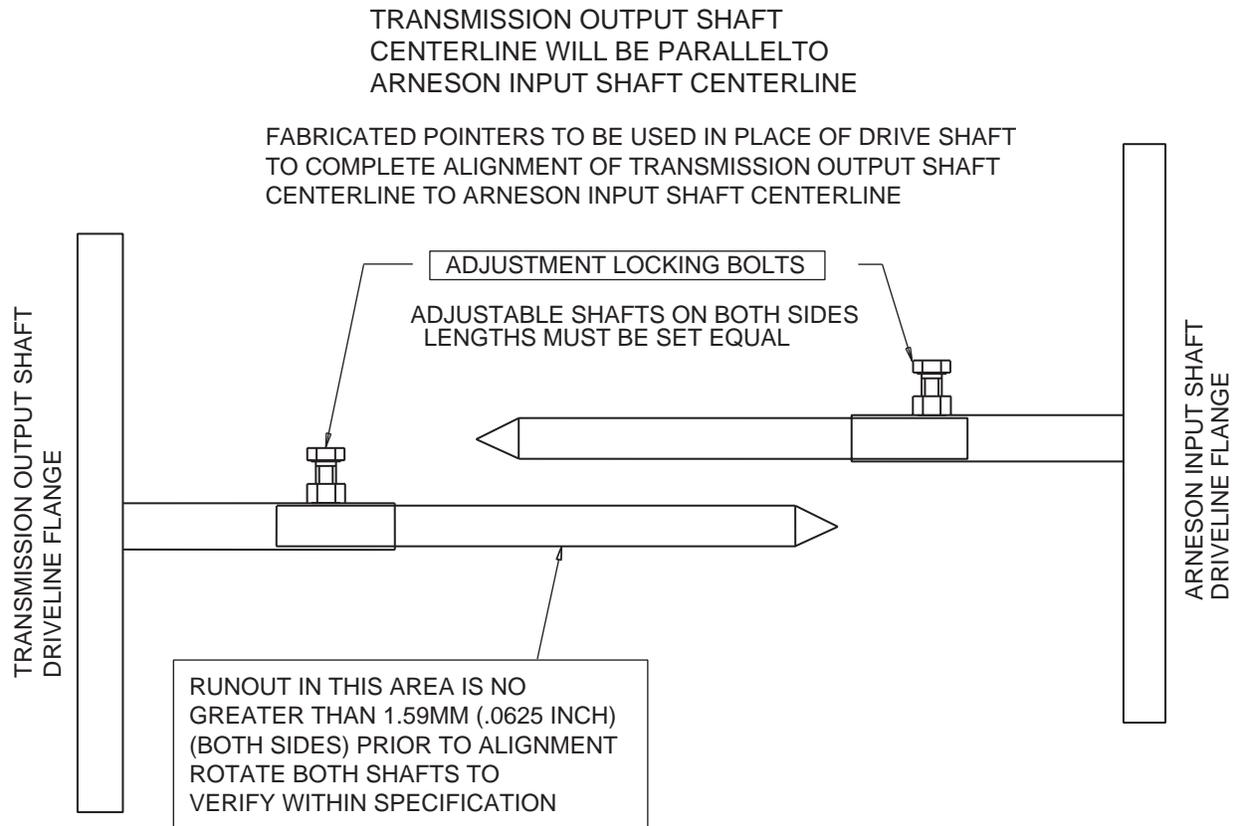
Remote or Island Mounted Alignment Tool, Shafts Parallel
